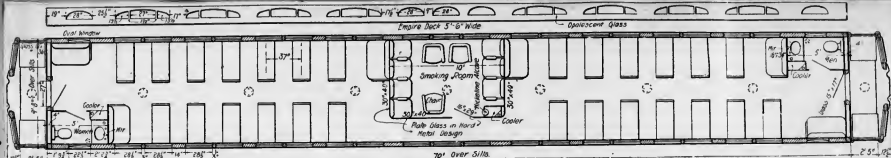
Floor Plan, New Coaches, Erie R. R.
